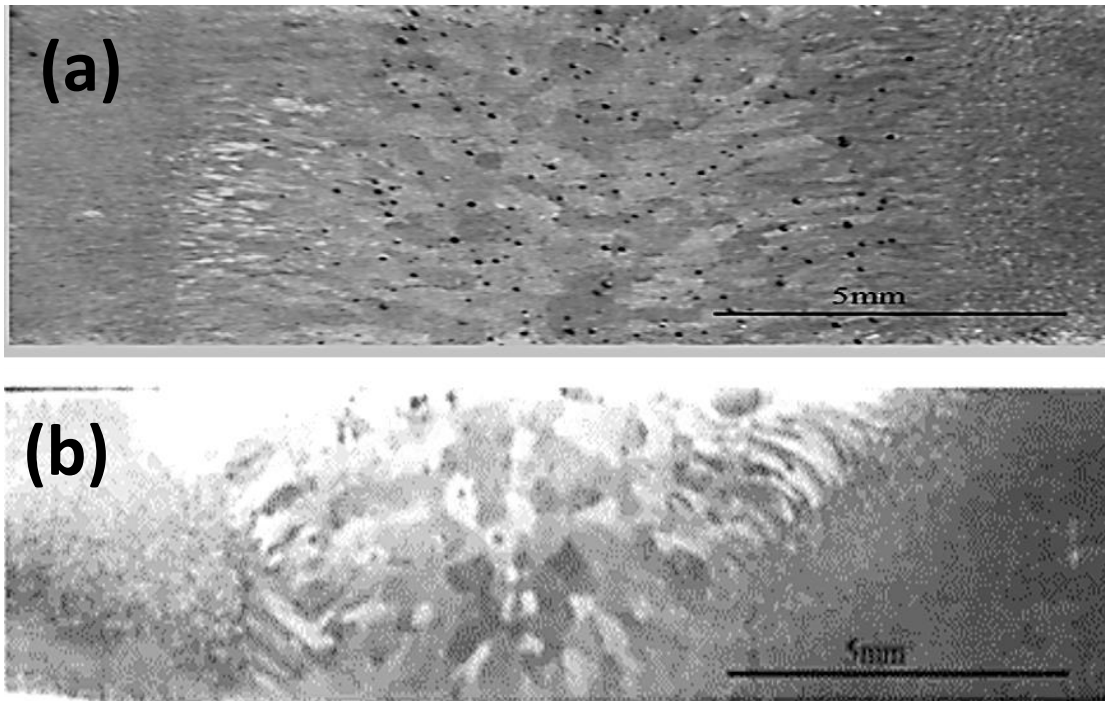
Macrostructure of (a) GMAW welded A5083 weldments showing numerous porosities and (b) TIG welded A5083 weldments showing no porosities (Liu et al. 2012)
